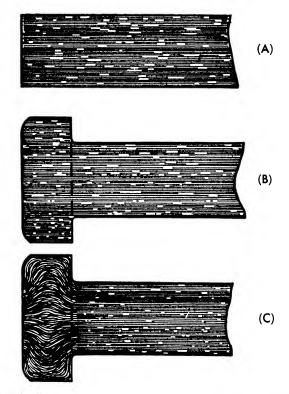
Sketch illustrating flow lines in bar stock (A), in machined bolt (B), and in hot forged bolt (C).
